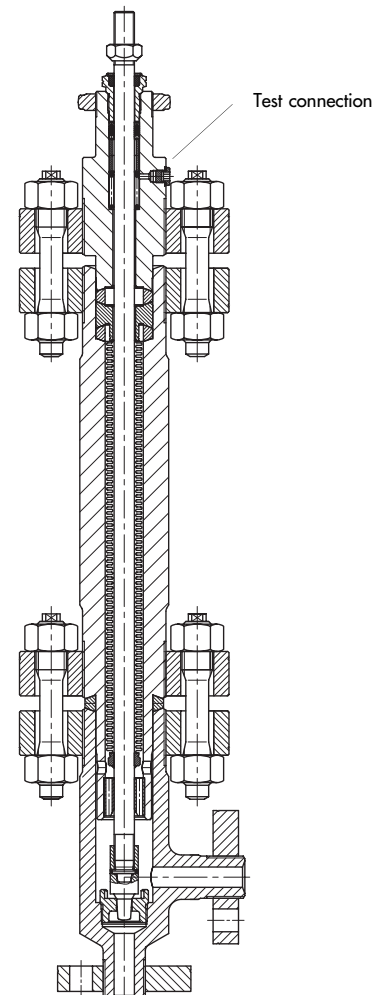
· Type 3259 Valve with metal bellows seal and test connection
